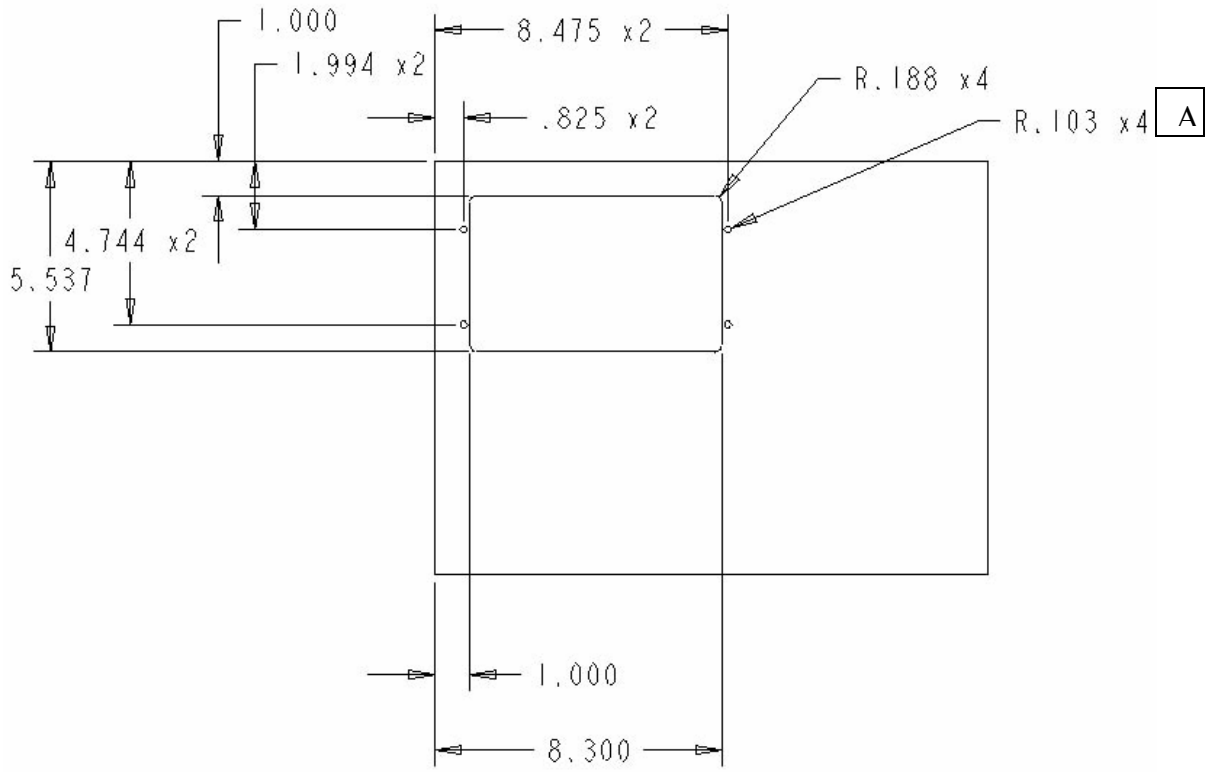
Dimensioned Drawing of the lid for the NEMA Type 1 Enclosure
